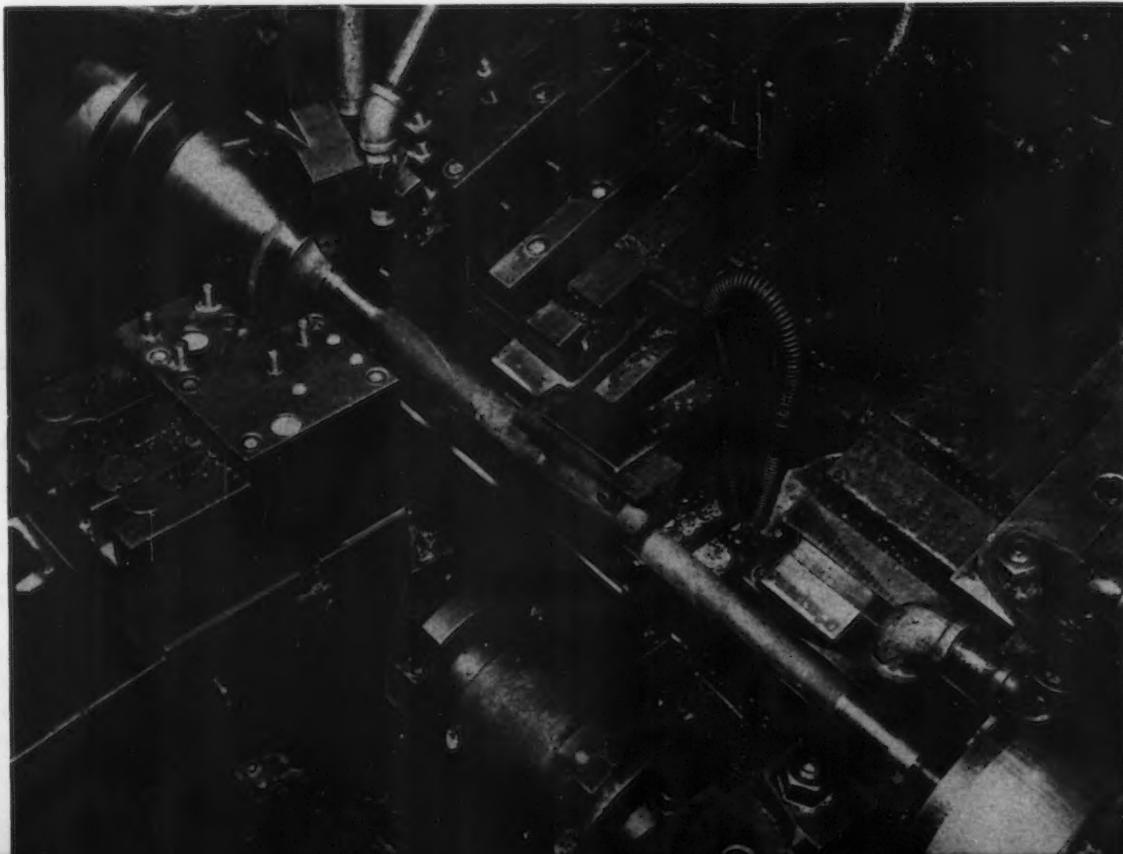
Chips fall into a chip chute in the base of the machine and are washed by the coolant into the chip drag for disposal. This chip drag serves several machines and the coolant is recovered for reuse.
